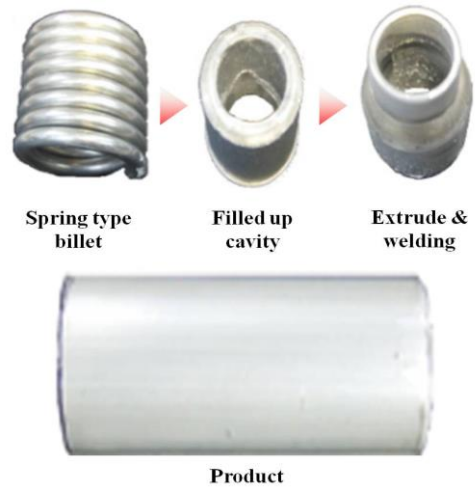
Shapes of welding concurrent extrusion formed pipe by using spring type wire material
